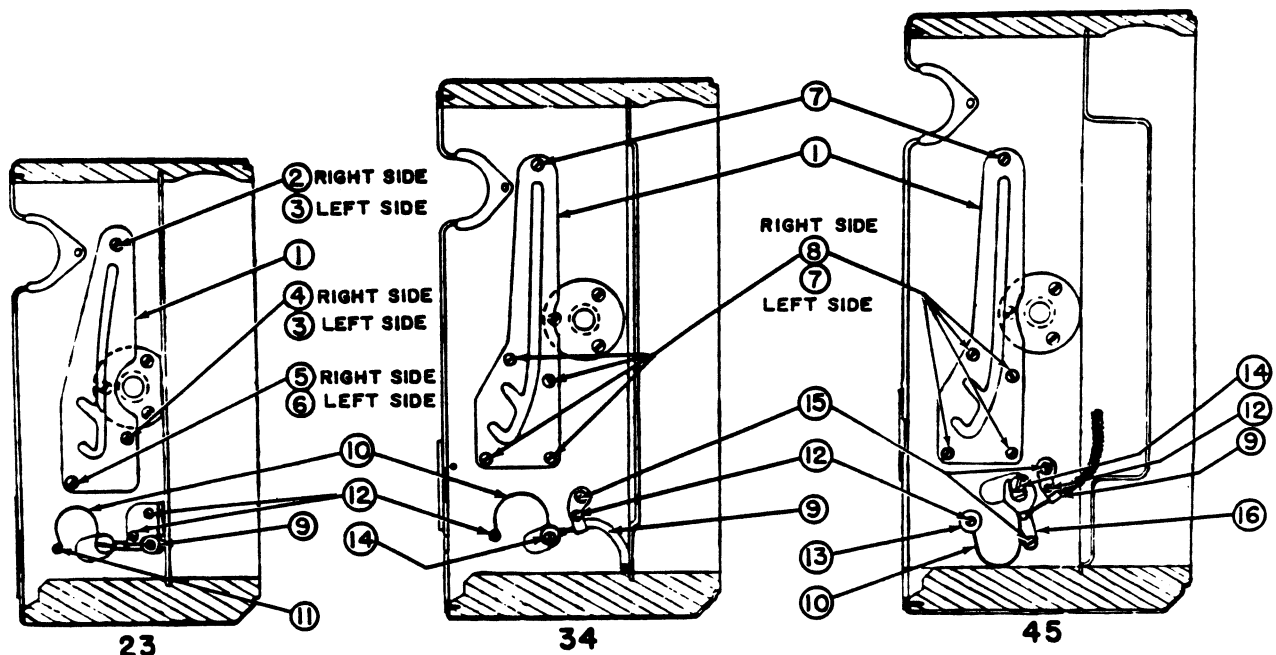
Right Bed Brace Plate and Cable Release Mounting
